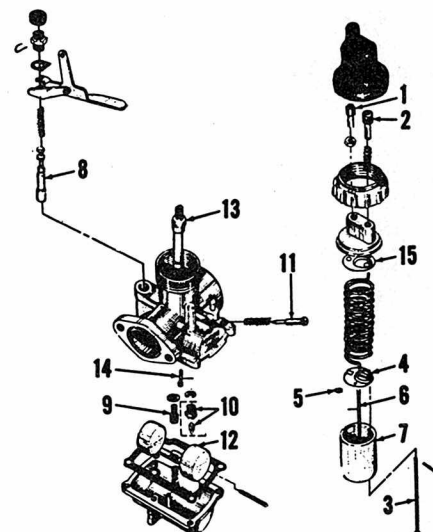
Exploded view of typical sliding valve carburetor used on all models.
